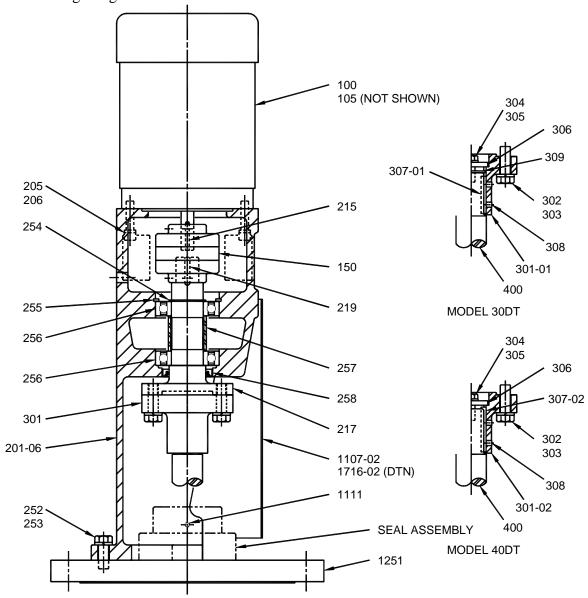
Model 30DTN, 40DTNS, 40DTNC, 40DTN Drive Assembly
